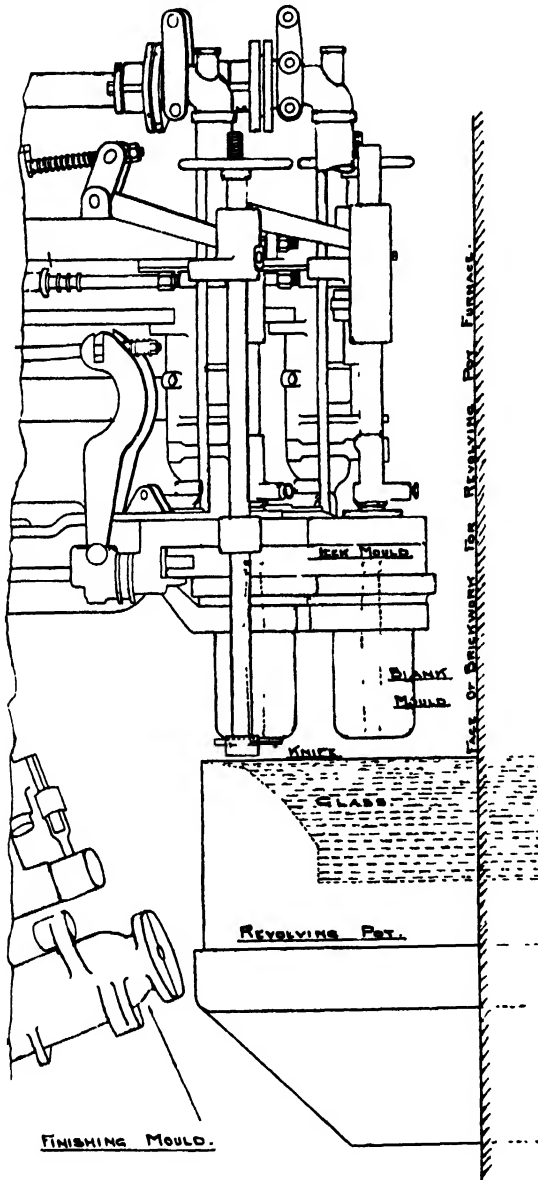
THE OWENS MACHINE (SHEARING DEVICE).
